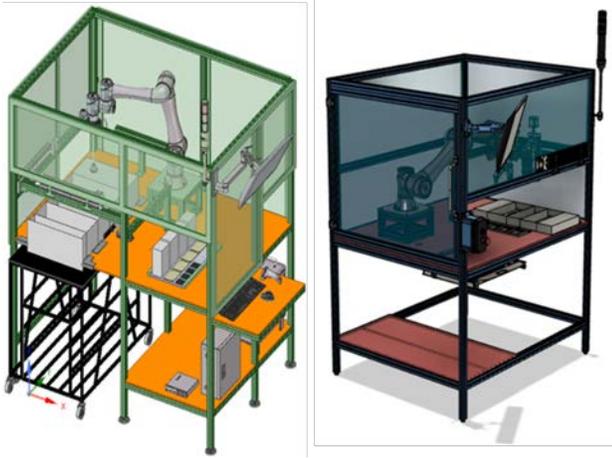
Example Illustrations of Enclosed COBOT Tools Used for Systems Assembly Integration
